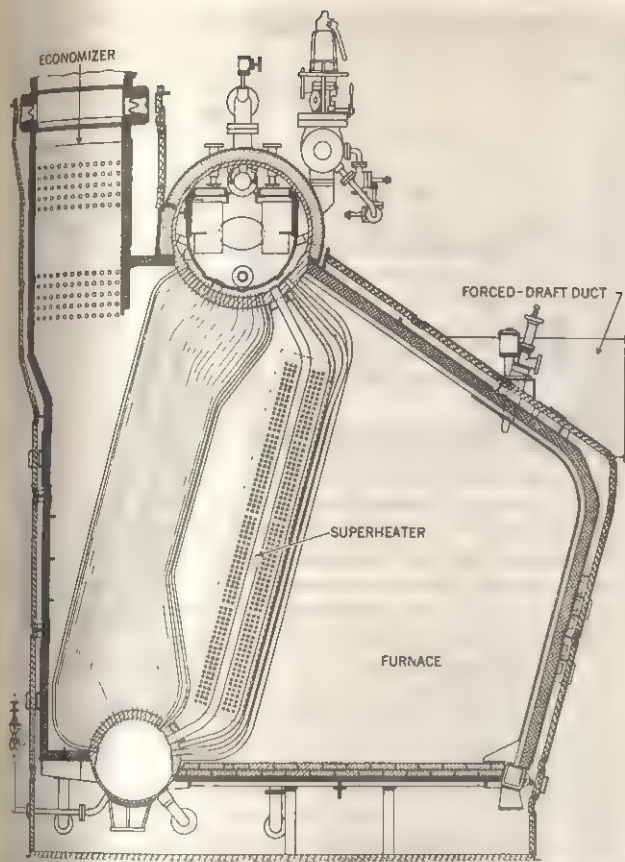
BABCOCK AND WILCOX MARINE WATERTUBE BOILER, INTEGRAL FURNACE TYPE
